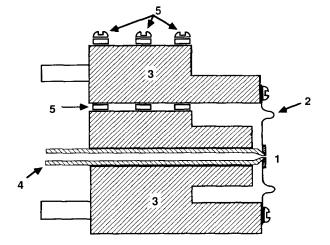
Assembly drawing of methyl radical source. (1) tantalum block, (2) molybdenum springs; (3) water cooled copper electrodes; (4) precision ground quartz tube; (5) alumina spacers.
